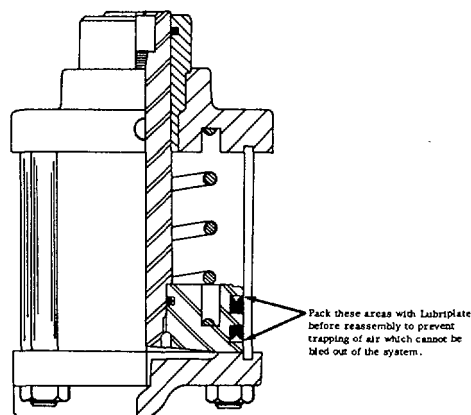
, F60159. Hydraulic loading cylinder
